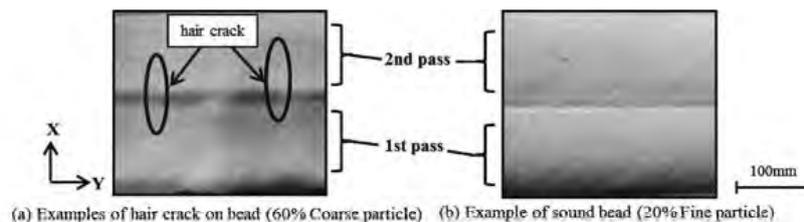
Examples of inspected PTA-welded surfaces by PT
